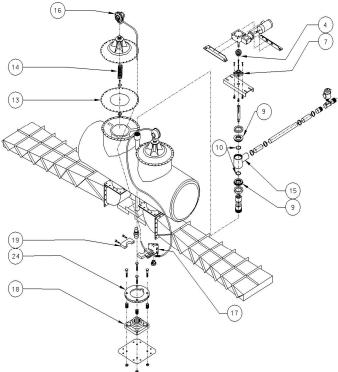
MCF756 and Larger Cleaning Mechanism
